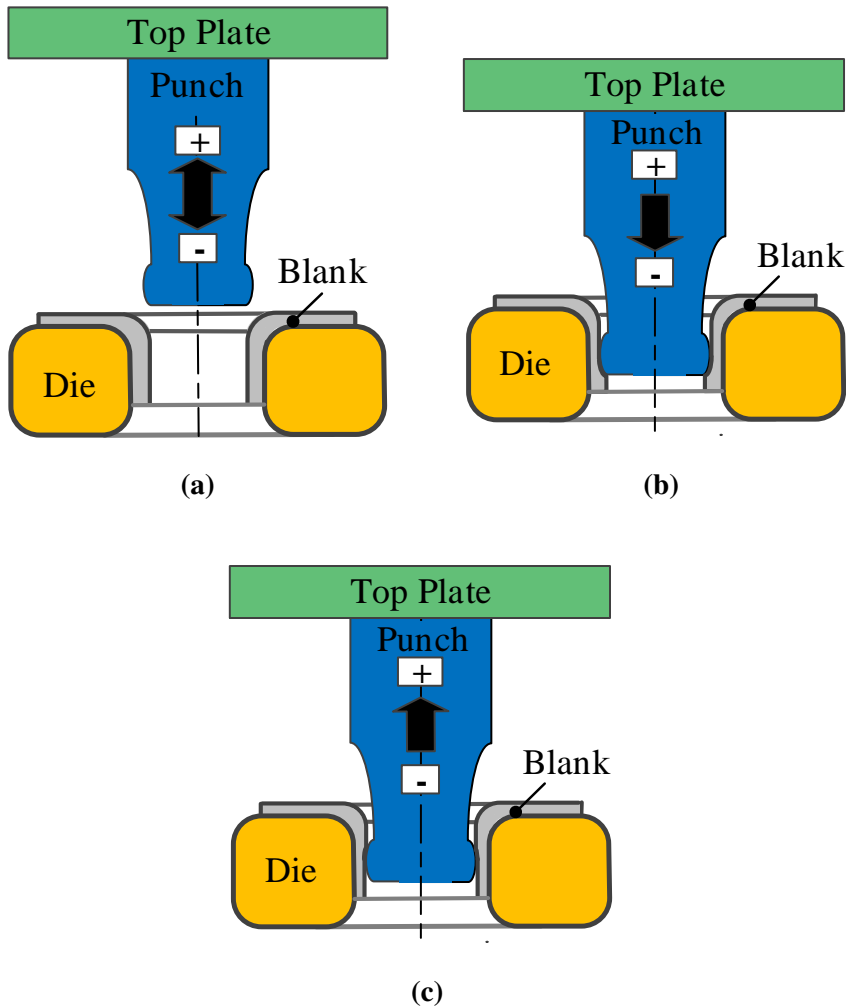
Outline of the tool set-up (a) while the tool is open, (b) during the forward stroke and (c) during the backward stroke.
